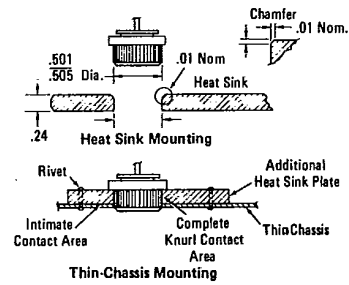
MOUNTING DETAILS FOR PRESSFIT THYRISTORS
